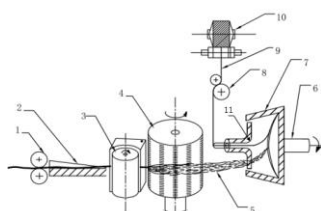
Three channel digital rotor spinning feed mechanism (a-1, combined feed rollers; 2, collector; 3, main roller; 4, carding roller; 5, fiber transport channel; 6, bearing; 7, rotor; 8, guide roller; 9- yarn; 10, bobbin; 11, ceramic false twister)
